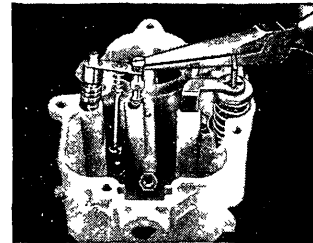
Install step-up piston ring, gasket and step-up piston, plate and rod. Securely tighten idle orifice tube. Check springs for damage
